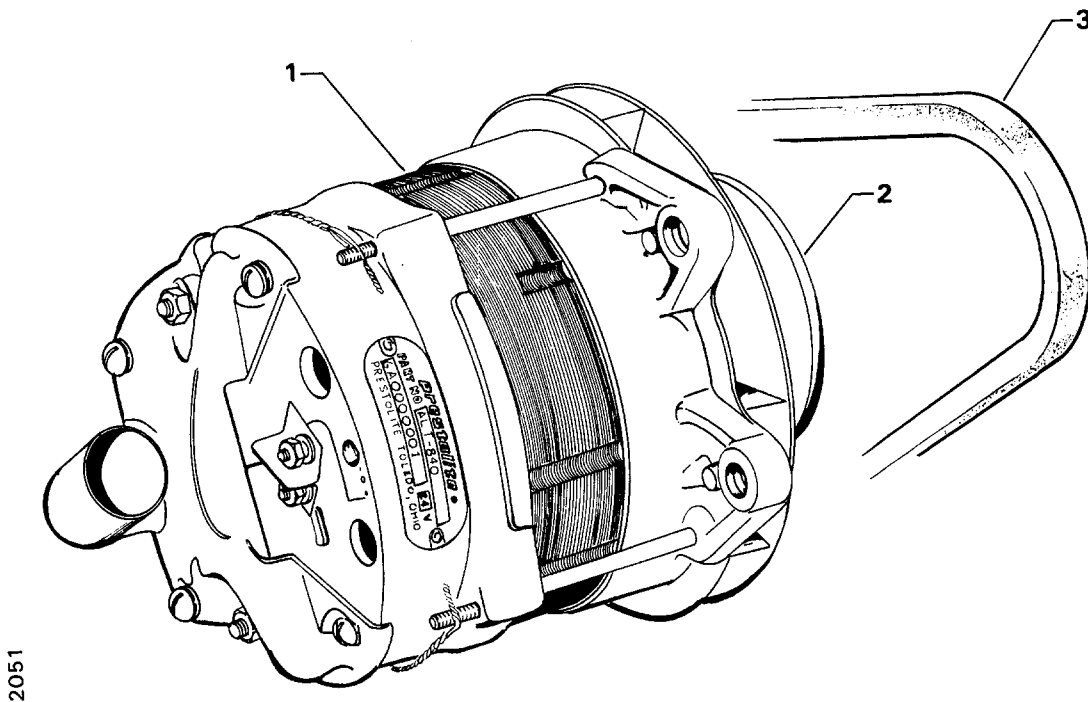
ALTERNATOR ASSEMBLY AND BELT
